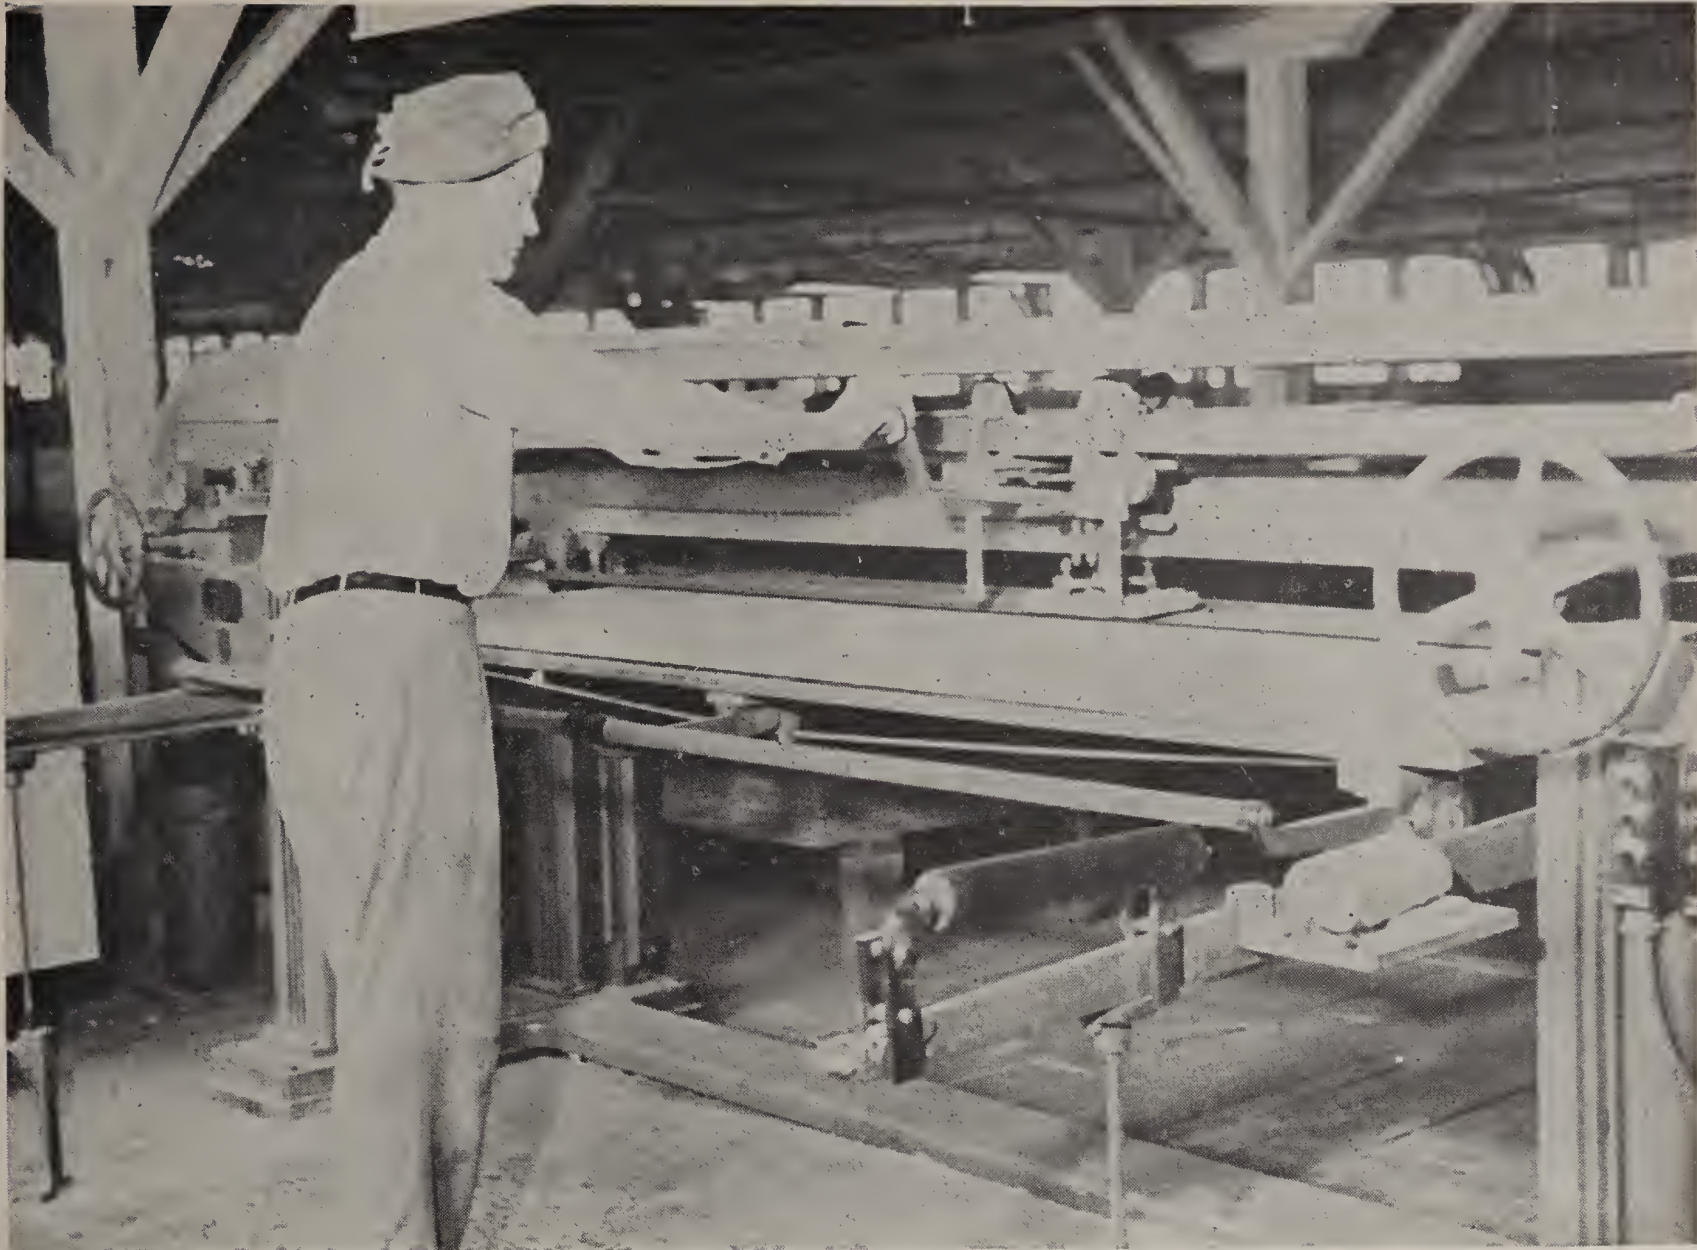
Sanding plywood panel with a belt sander.
